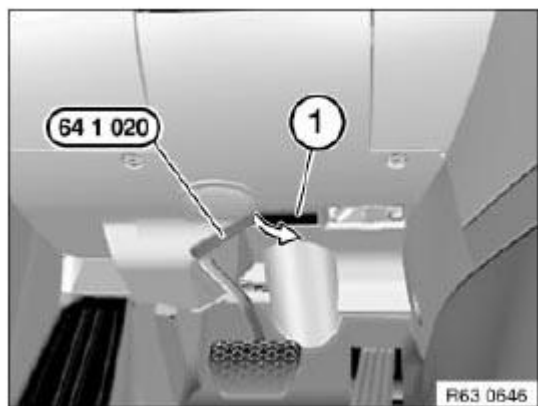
Identifying Footwell Light With Special Tool (64 1 020)
